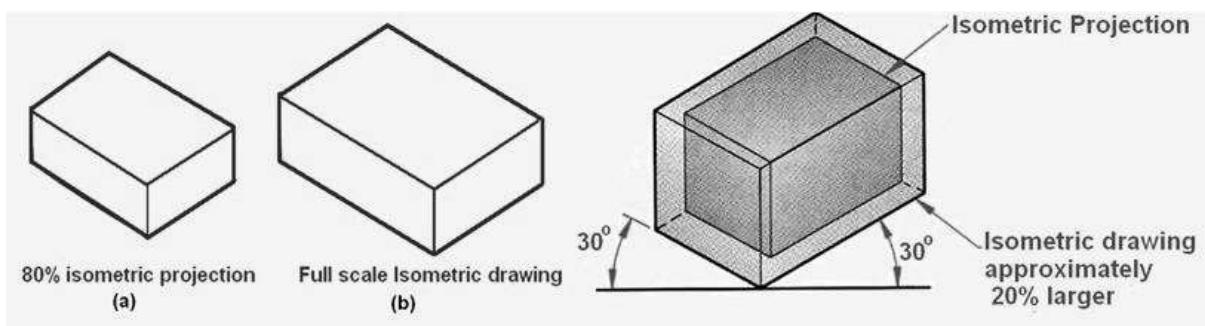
Shows the (a) isometric projection and (b) isometric drawing (or view) of a cuboid.
